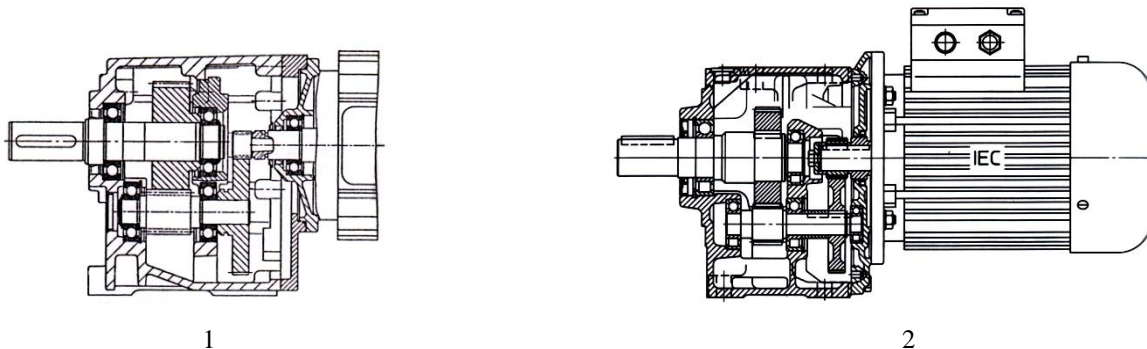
Gearmotor with special reducer motor Lenze (1) and gearmotor with standard electric motor ROSSI(2)[7, 8]
